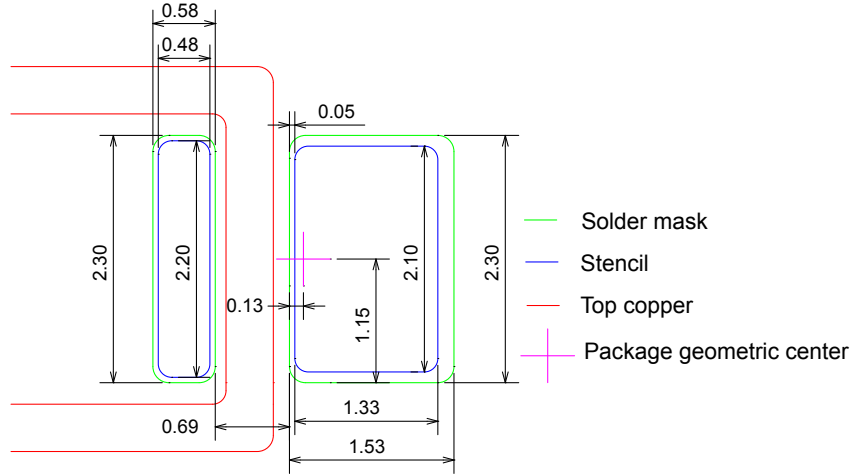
Recommended PCB solder pad layout for LUXEON SkyBlue.
